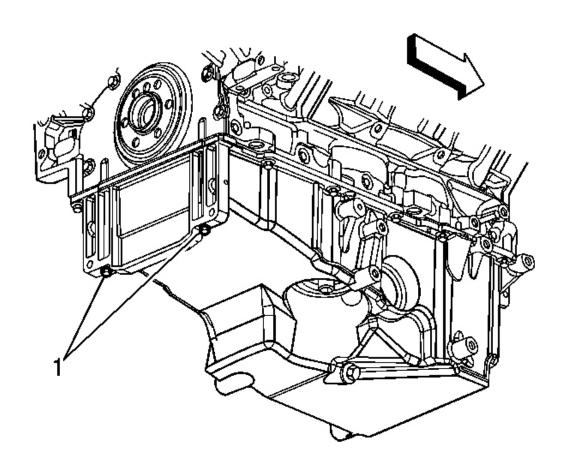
View Of Oil Pan-To-Rear Cover Bolts Courtesy of GENERAL MOTORS CORP.
